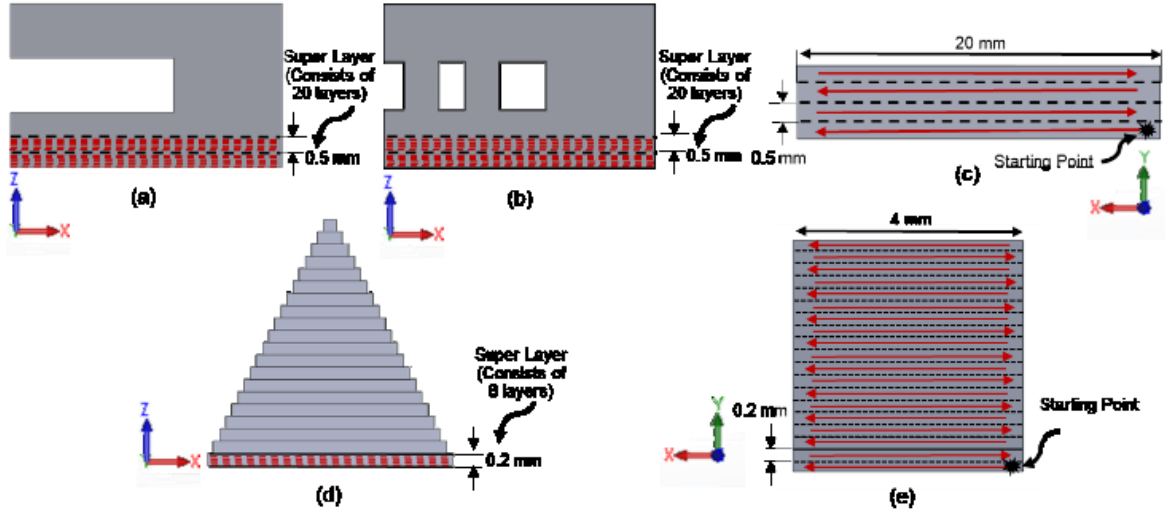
(a) Side view of C-shaped part, (b) Side view of C-shaped part with supports (c) Scanning strategy of the two C-shaped parts from top view, (d) Side view of pyramid part, (e) Scanning strategy of pyramid part from its top view.
